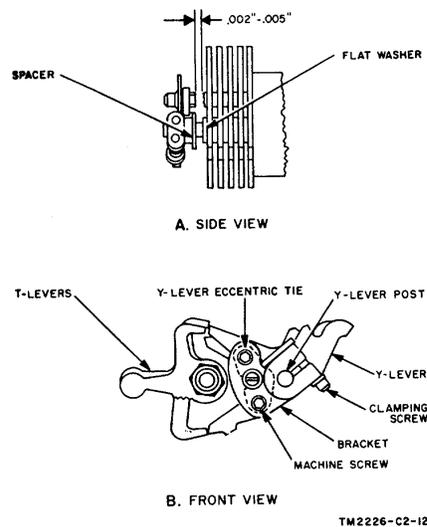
Y-lever stud bracket adjustment (equipment furnished with Y-lever stabilizer assembly).
